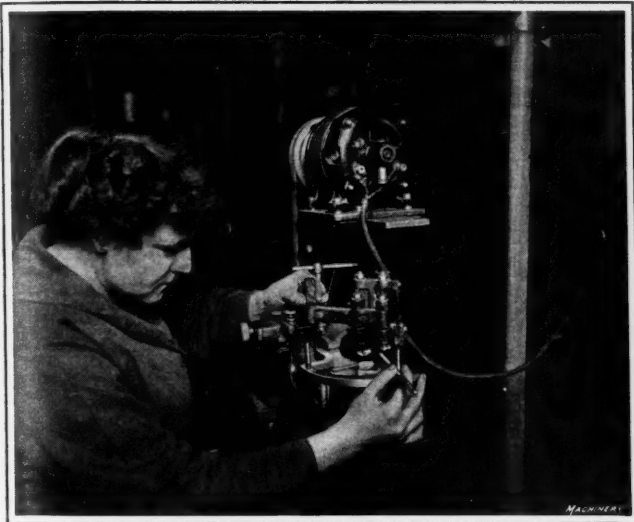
Special Truing Machine for Grinding Points formed to Some Other Shape than Frustum of Cone
